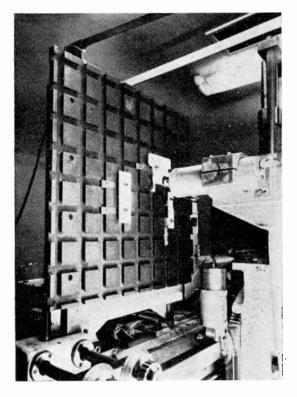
The method of mounting the sensing head and the template carrier. The latter is hydraulically positioned. Three templates can be seen mounted and these can be brought into use to enable different parts of the work to be machined.
